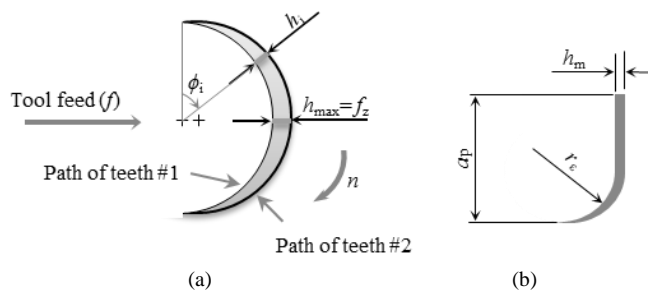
(a) Scheme of the upper view of the cutting tooth paths to calculate h_m , (b) Side view of theoretical mean cutting section
